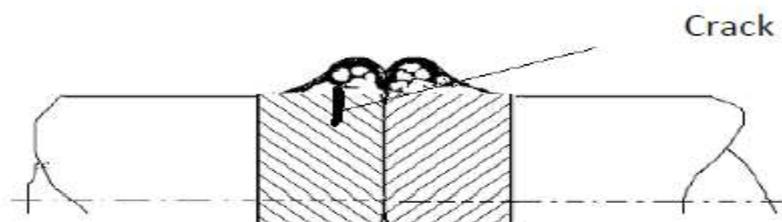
Crack at the sharp edge transitional area to weld flash
